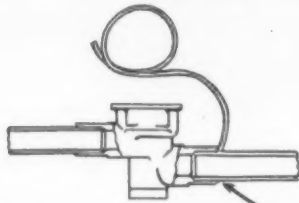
Refrigerant lines are soldered to the valve connections in the usual manner. Danger of distorting internal parts is eliminated because all these parts have been removed.
